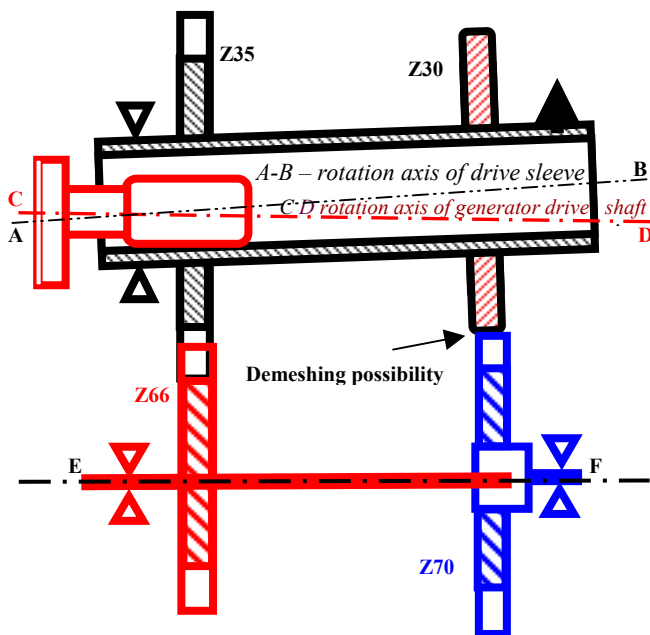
Geometry of mating elements situated inside the generator power gearbox by a skew location of a drive sleeve relative to rotation axis of generator shaft: A-B – rotation axis of drive sleeve (constituting also a rotation axis of Z35 and Z30 gear wheels), C-D – rotation axis of generator drive shaft, E-F – rotation axis of Z66 and Z70 gear wheel; The C-D axis is parallel to the E-F axis, The A-B axis misaligned with respect to the C-D axis, F – vector of force leading to misalignment.
